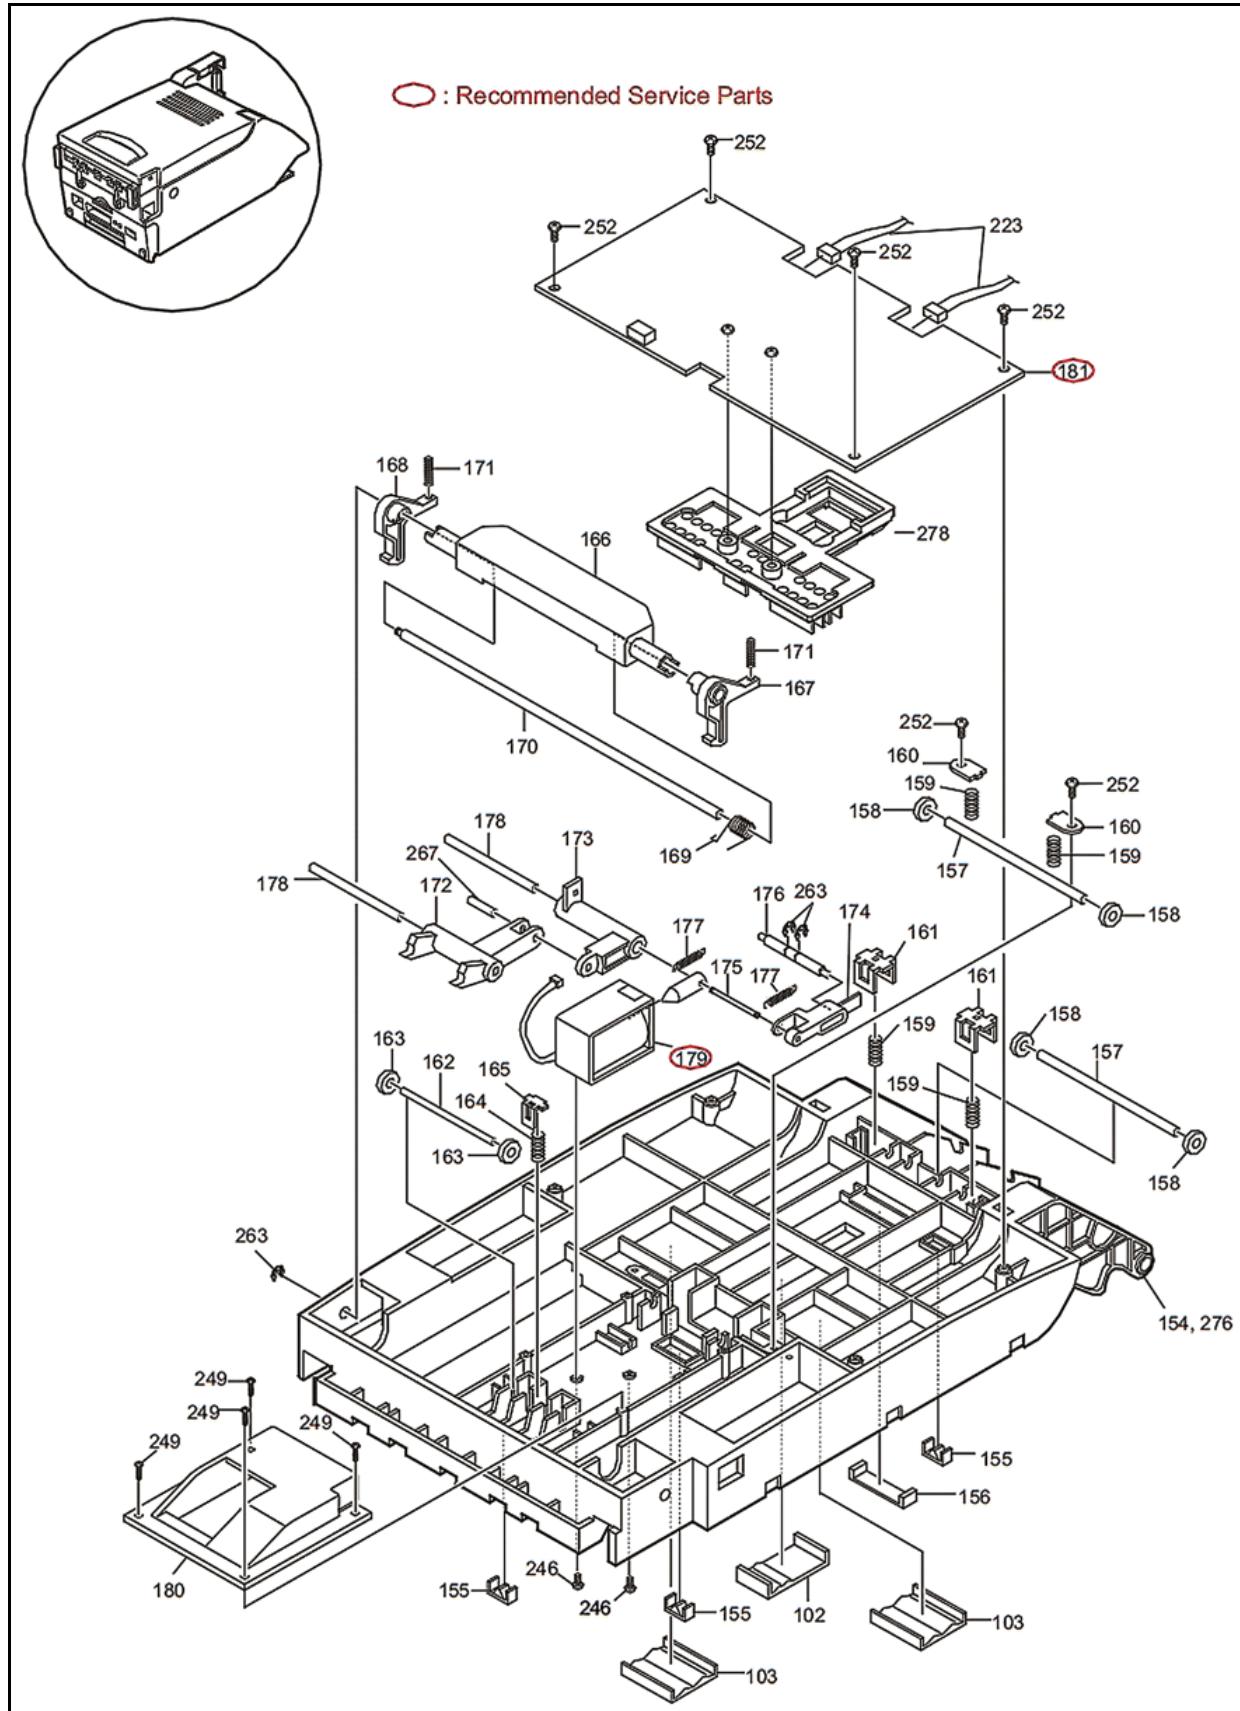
UBA Transport Cover Assembly Exploded View (Part 1)
